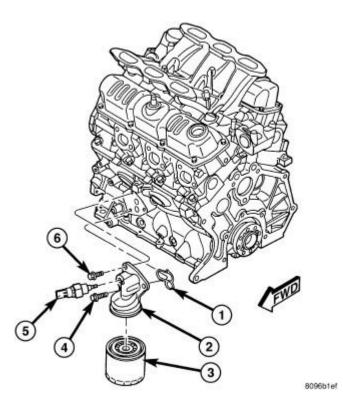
Removing/Installing Oil Filter Adapter Courtesy of CHRYSLER LLC
